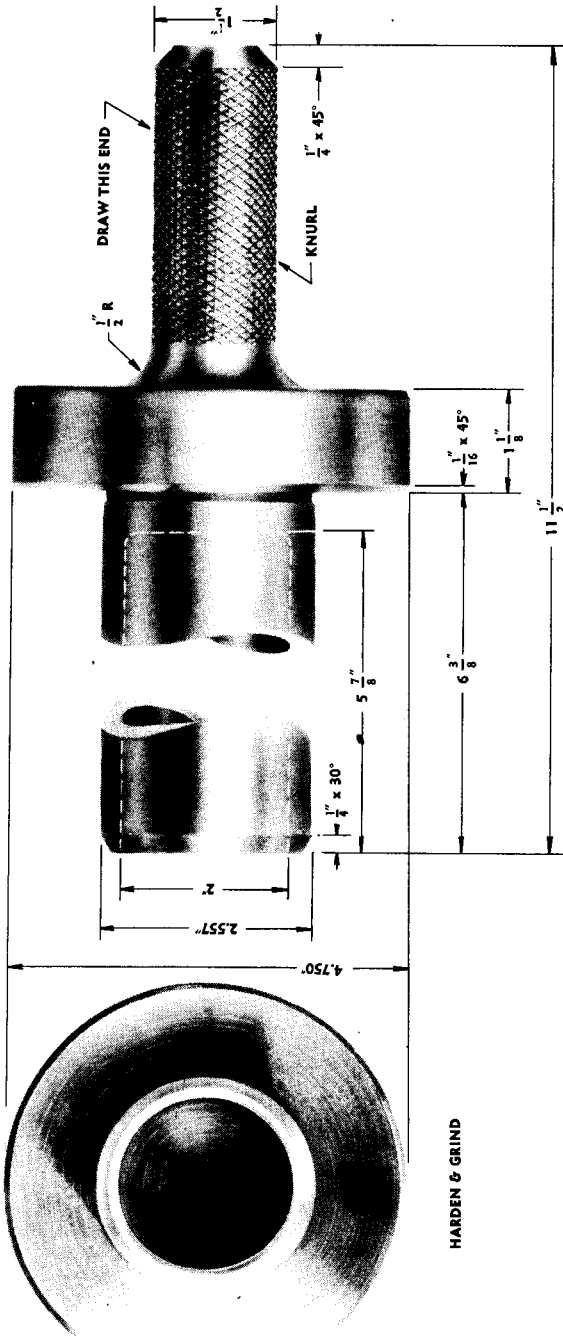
Track Adjusting Idler Bearing Driving Tool
